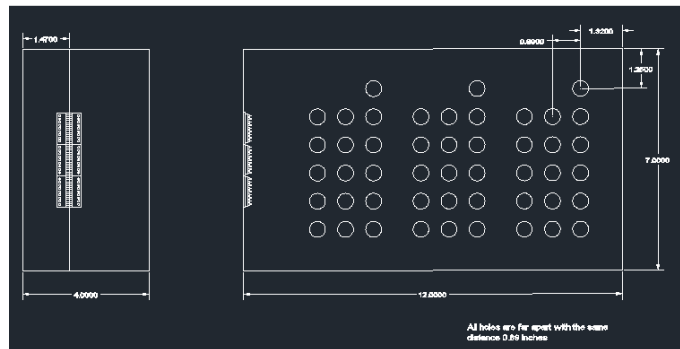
Drawing of aluminum box of size 4x7x12 inches to mount photo-detectors
